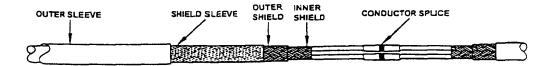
Double Shield Cable Repair with Solder Sleeve Primary Splice (Sheet 1 of 3)
